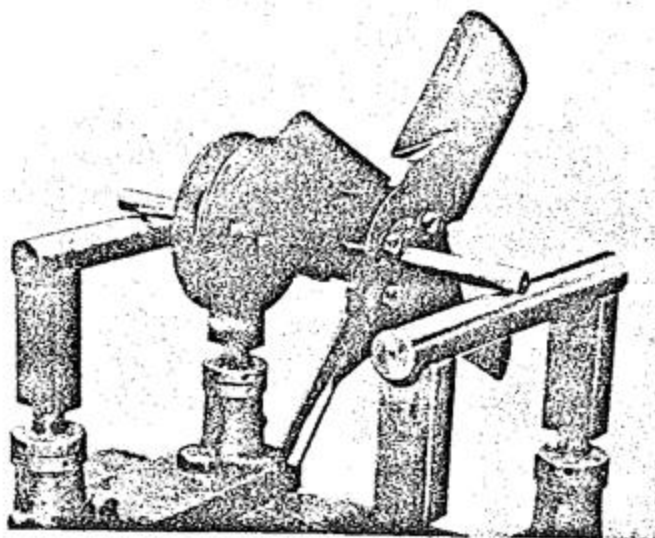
The balancing of fan blade assembly, also showing the hole to be drilled for location of balancer
